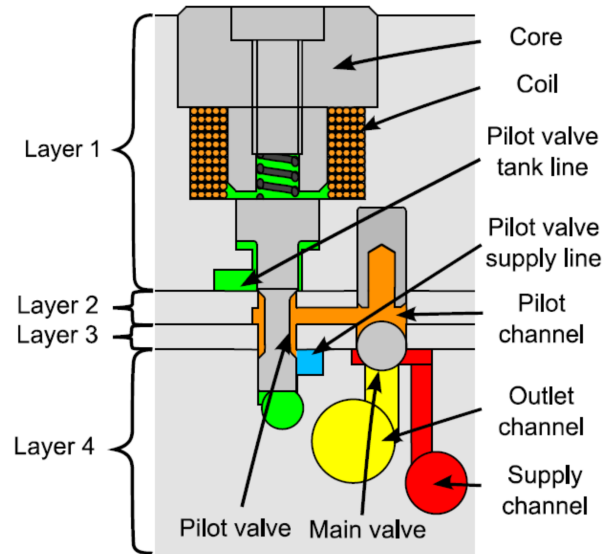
Cross section of a fast switching valve showing manufacturing and assembly features (taken from [45])
